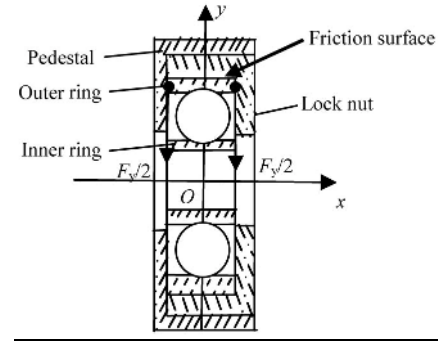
Force diagram of the bearing outer ring and lock nut.
